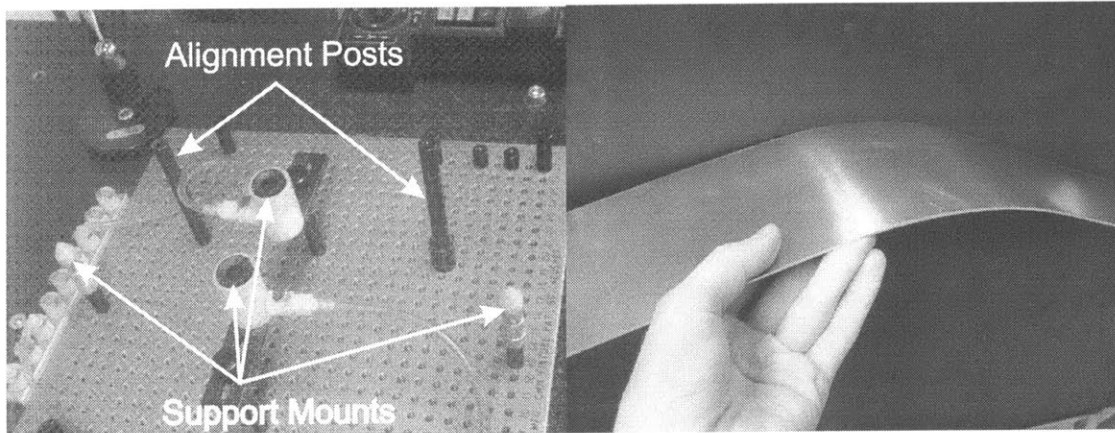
Part support for use in coordinate measurement machine (left) and formed part (right).
